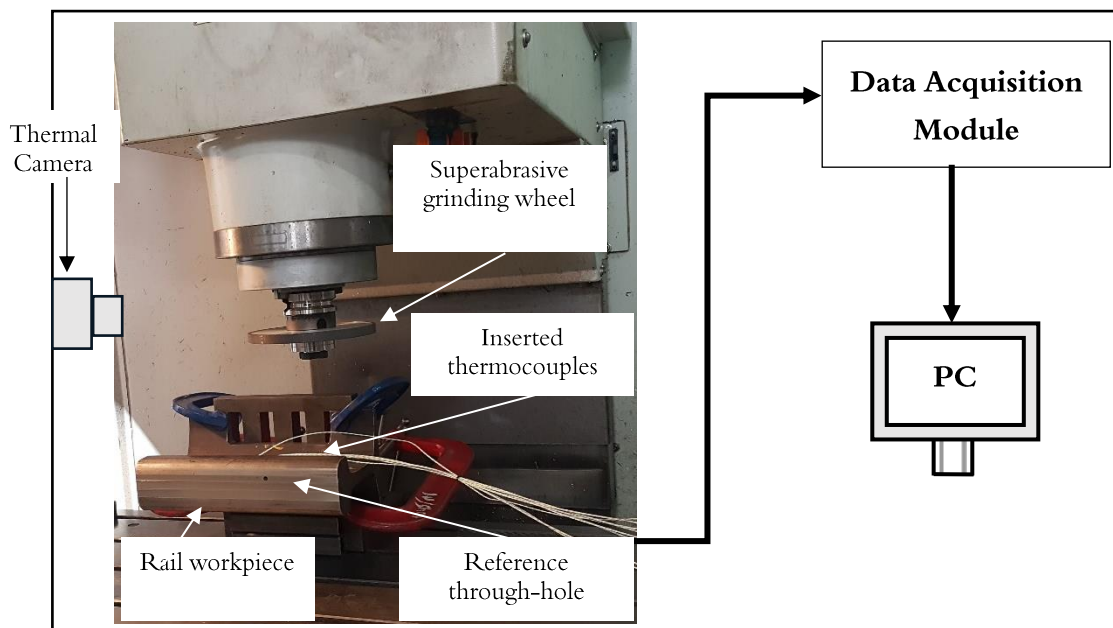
Experimental configuration in XYZ machine tool depicting the rail workpiece, superabrasive grinding wheel and thermocouples for temperature measurement.
